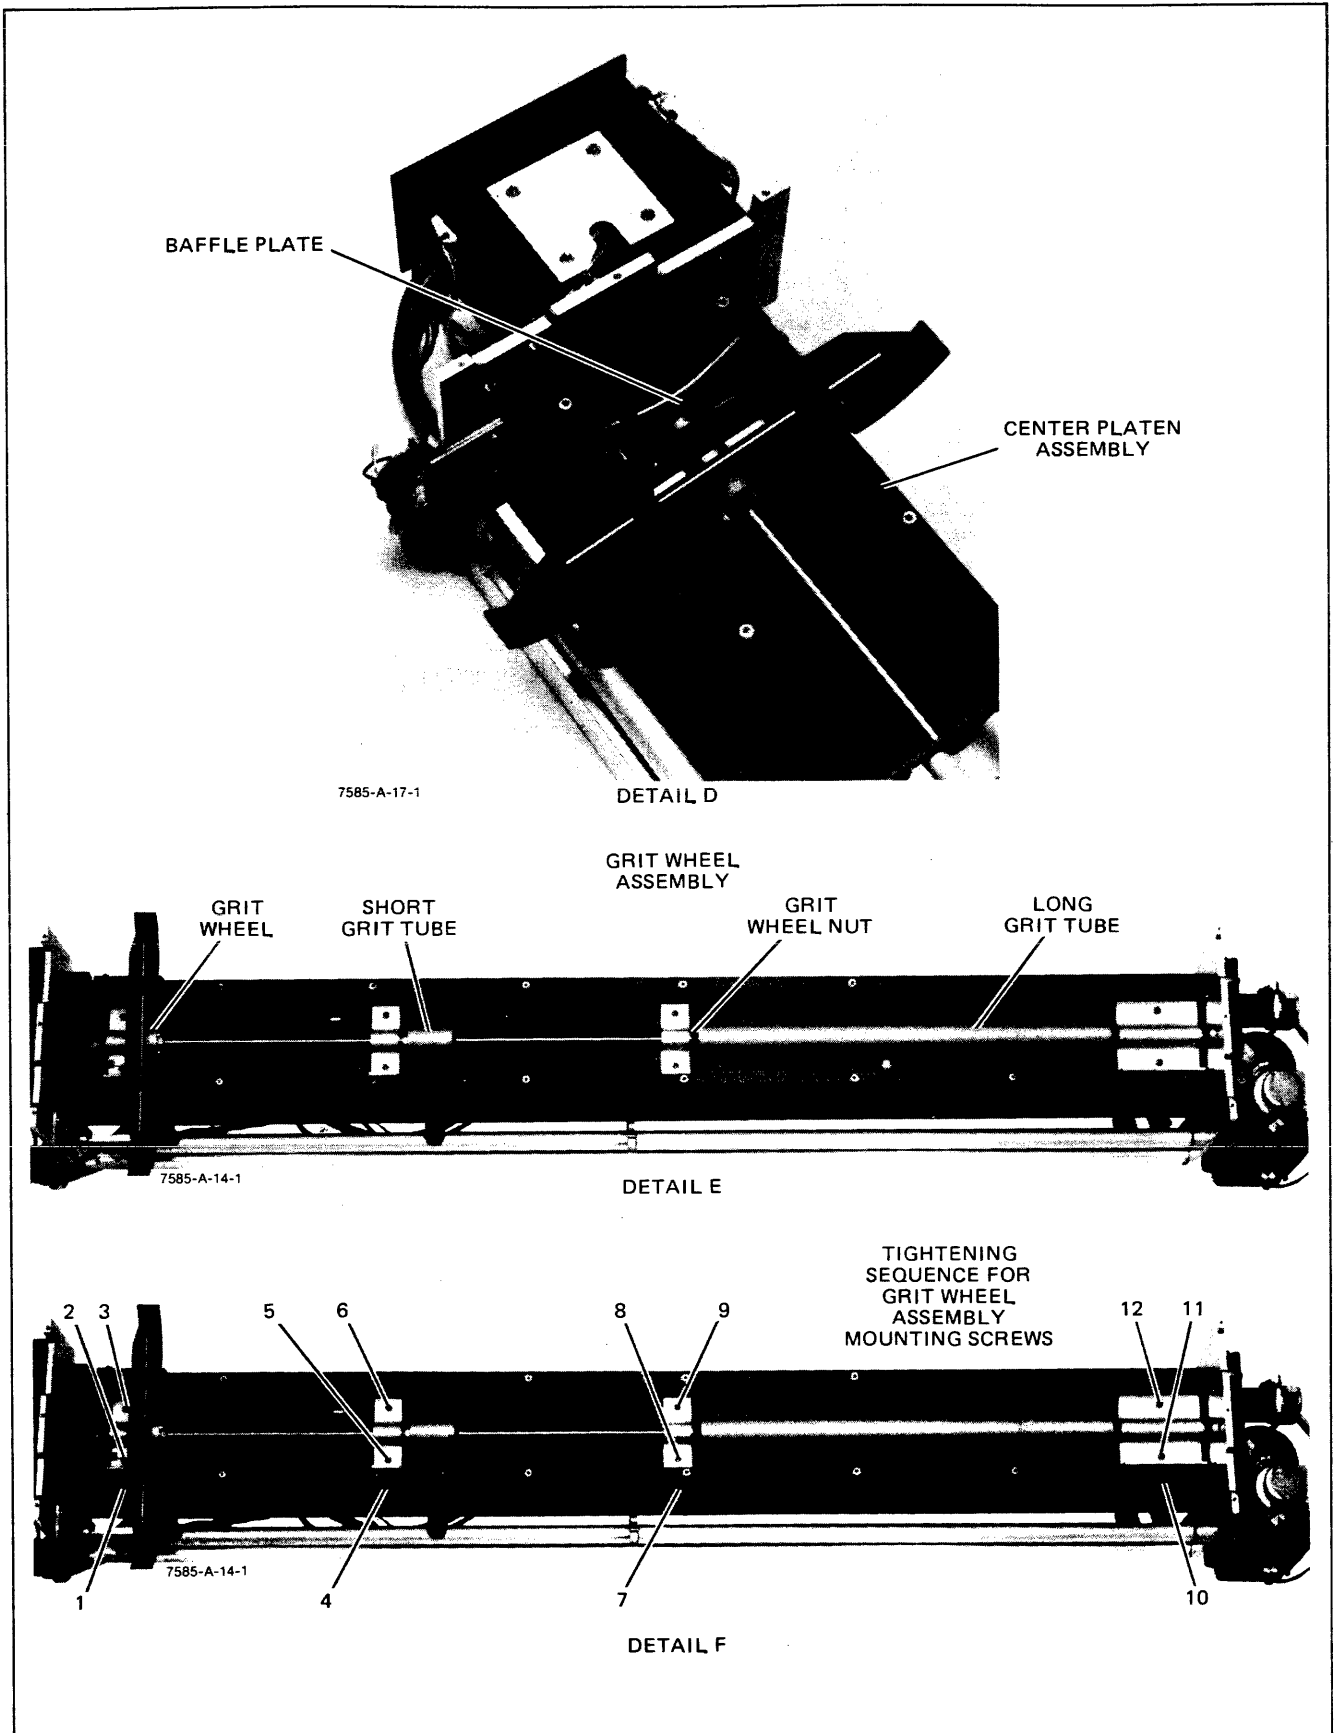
Grit Wheel Replacement (Sheet 2 of 2)
